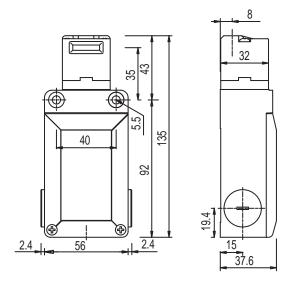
Dimensions L100-P3C3-M20-MLM24 in mm
